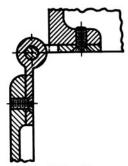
Common steel hinge applied to a machine-tool cover.
